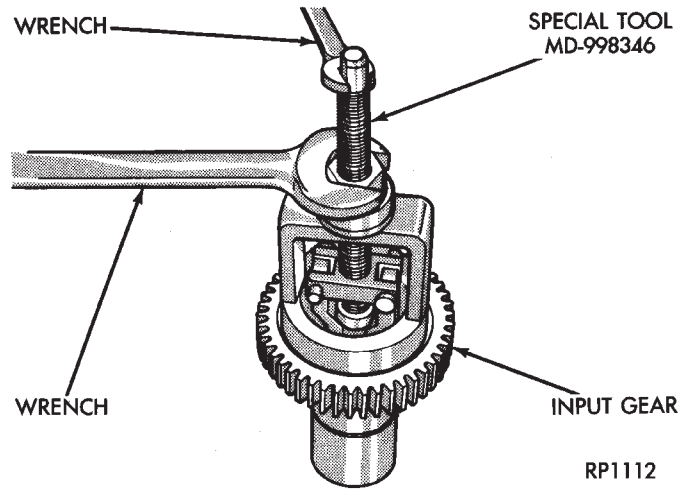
Removing Mainshaft Pilot Bearing From Input Gear
